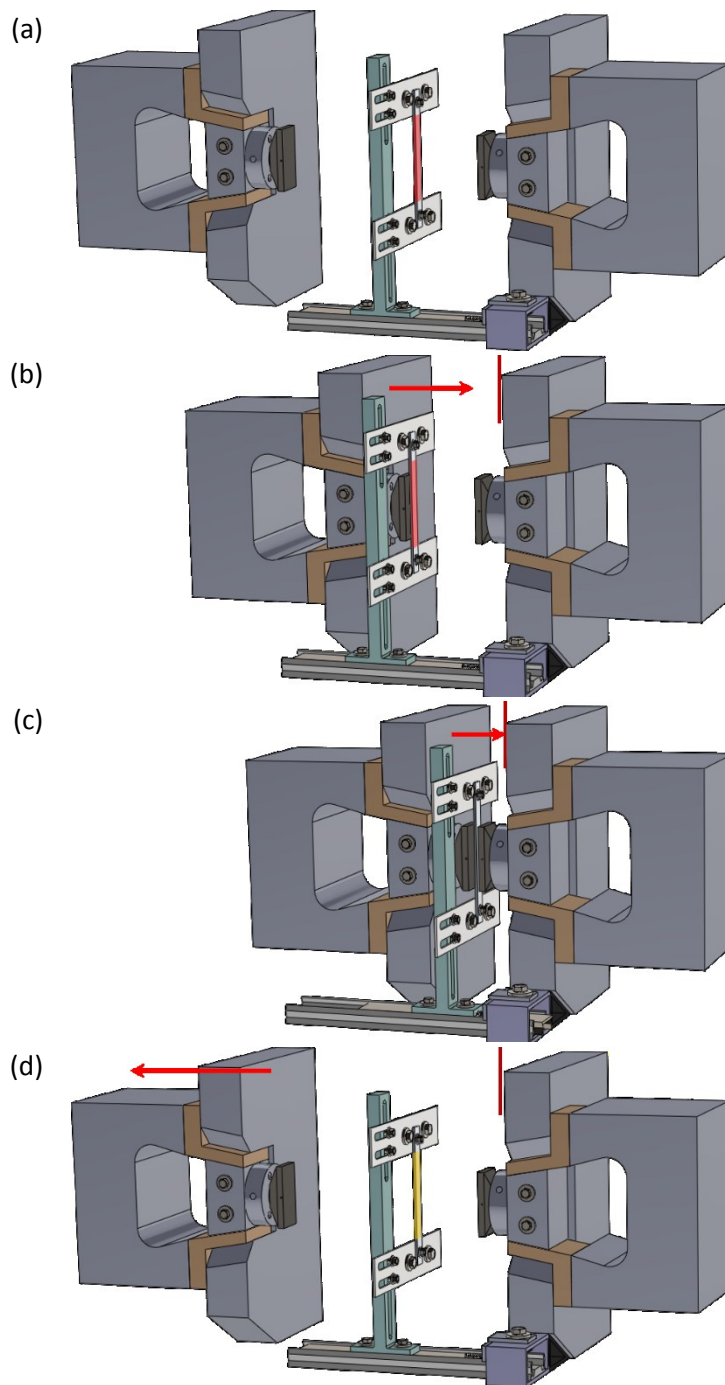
Operations to simulate FAST process: (a) heating; (b) punch pushing workpiece towards die; (c) stamping and quenching under constant pressure; (d) punch moving back, spring pushing workpiece back, incubating (artificial ageing).
